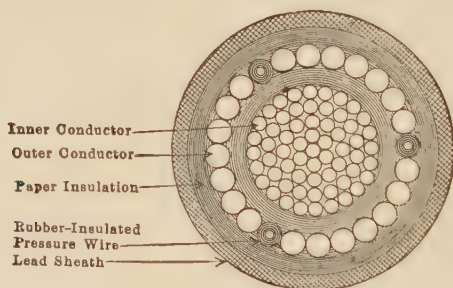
Cross-section of a 220-volt, 1,000,000-C.M. concentric cable.
